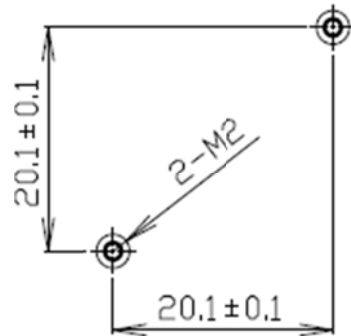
Suggested Guide Pin & Mounting Screw Hole Location (millimeters)
